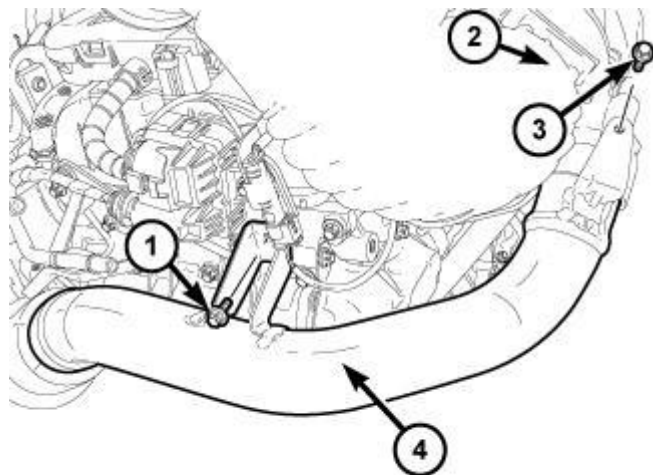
Front Upper, Lower Air Charge Hose & Clamp
